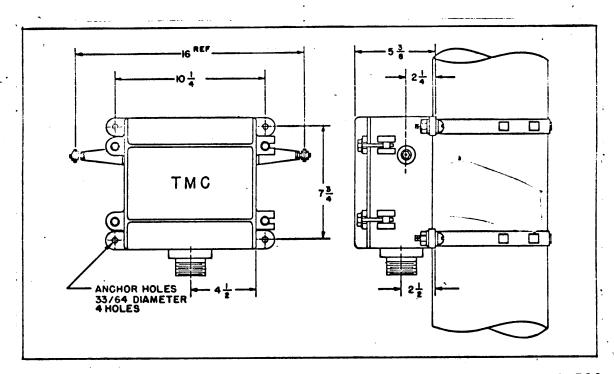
OUTLINE AND MOUNTING DIMENSIONS, MODEL TRC-500
